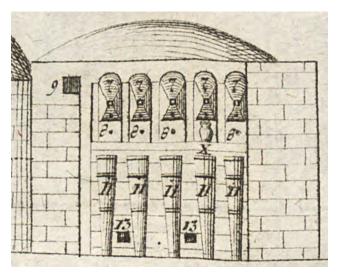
Detail of the Flurl elevation plan of a cooling furnace with a cooling vessel under the fourth working hole (X).
